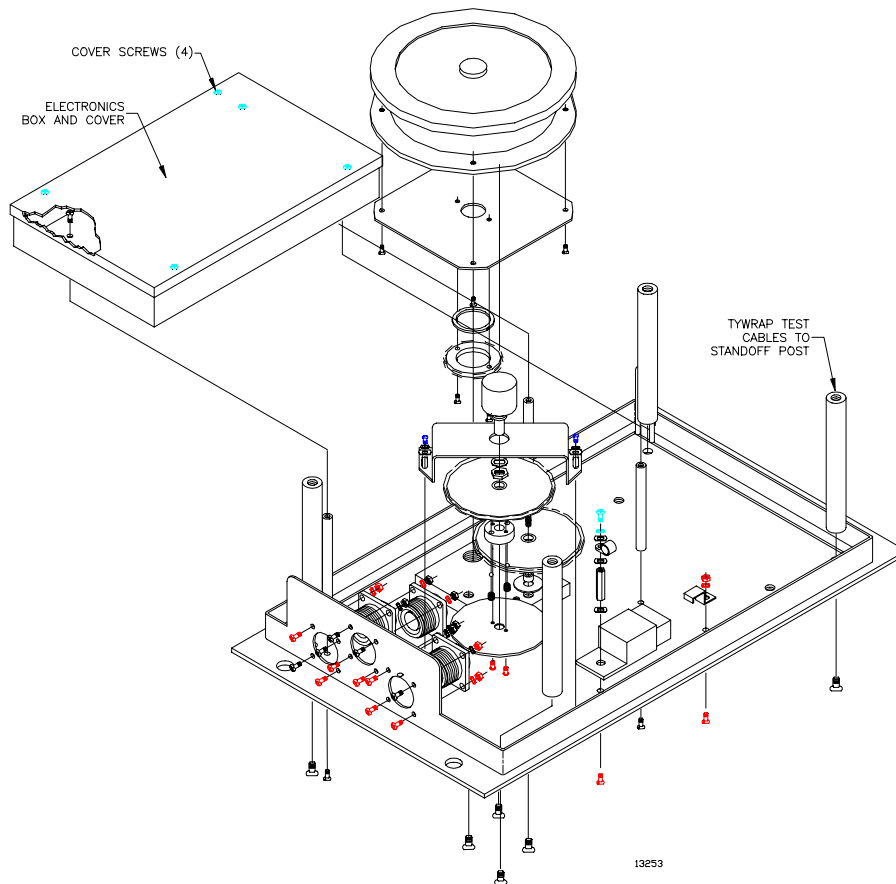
THE OSS-463E UNIT - EXPLODED VIEW (A9)
